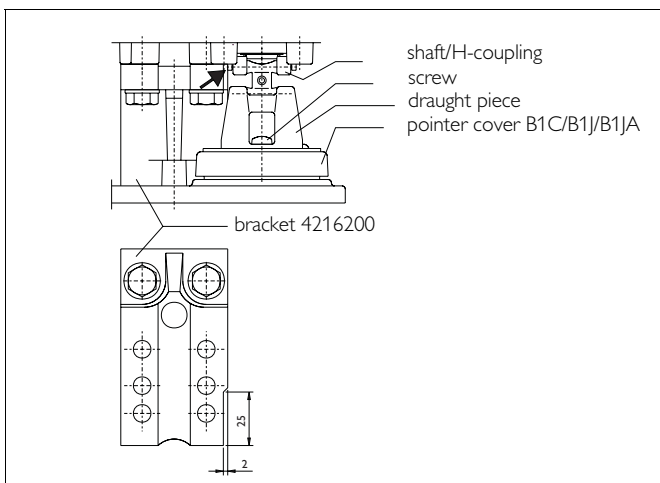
Installing NT700/S1 position transmitter on B series actuator (older version).
